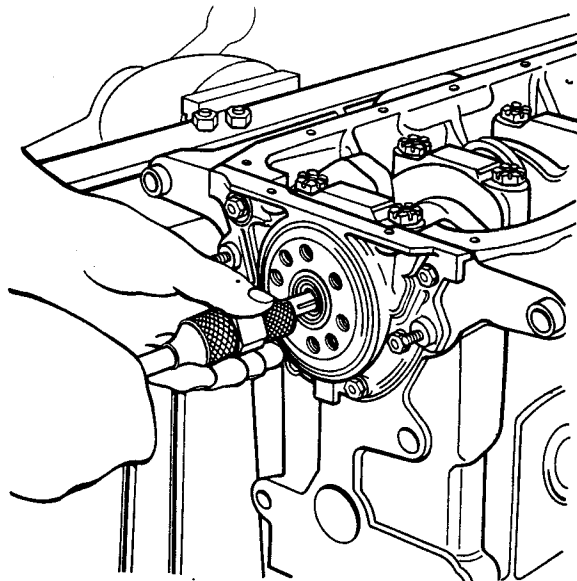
Pressing Out Gearbox Shaft Bearing from Crankshaft with Remover Tool A.40006
